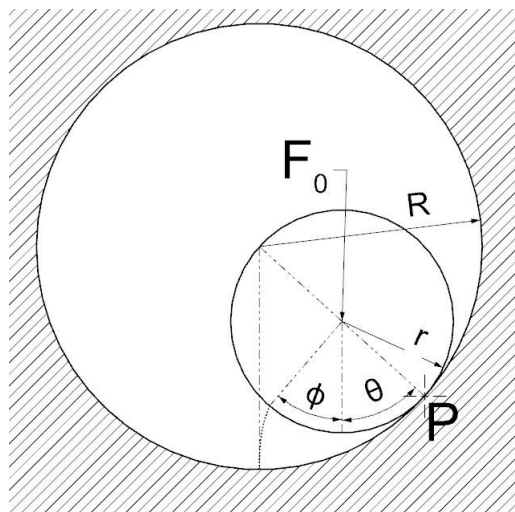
Sketch of the guide vane stem inside of the bearing. Shown in a perturbed position after rotating an angle ϕ . Difference in diameter is greatly exaggerated.
